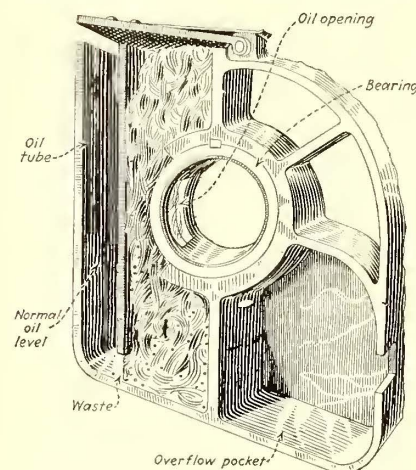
SECTION OF MODERN AXLE BEARING CAP
